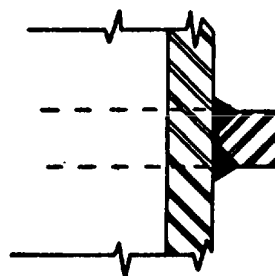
FILLET AND SOCKET WELD DETAILS AND DIMENSIONS
